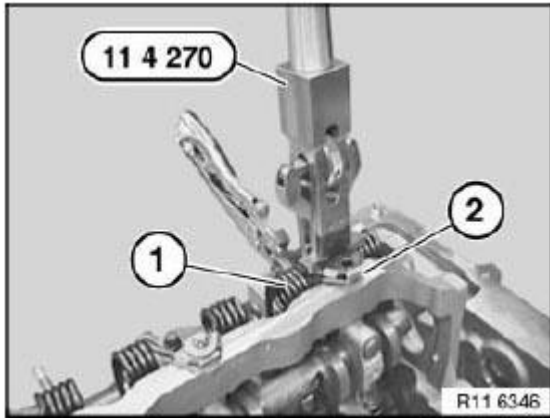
Special Tool (11 4 270), Torsion Spring And Metal Lug
